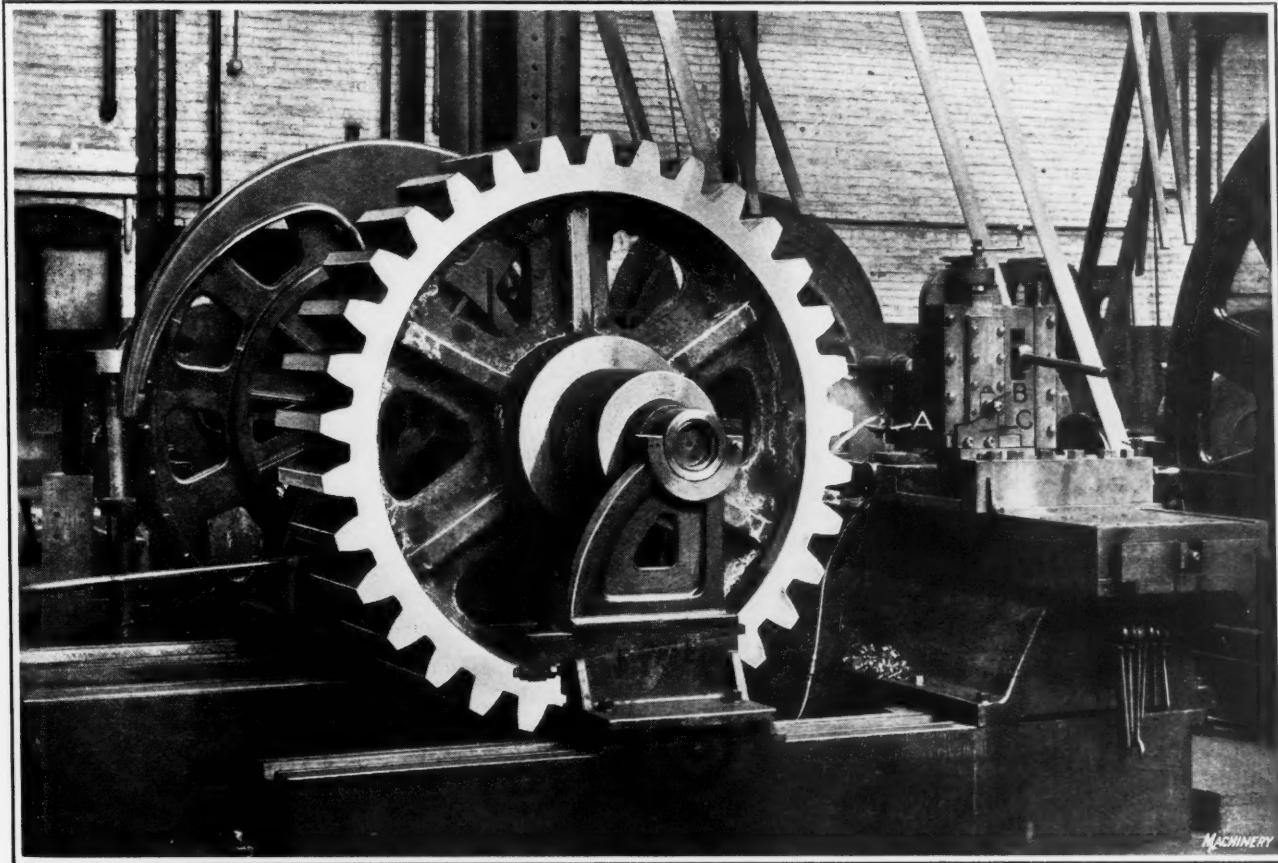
Gear Planer of the Templet or Form-copying Type with Finished Spur Gear in Position
